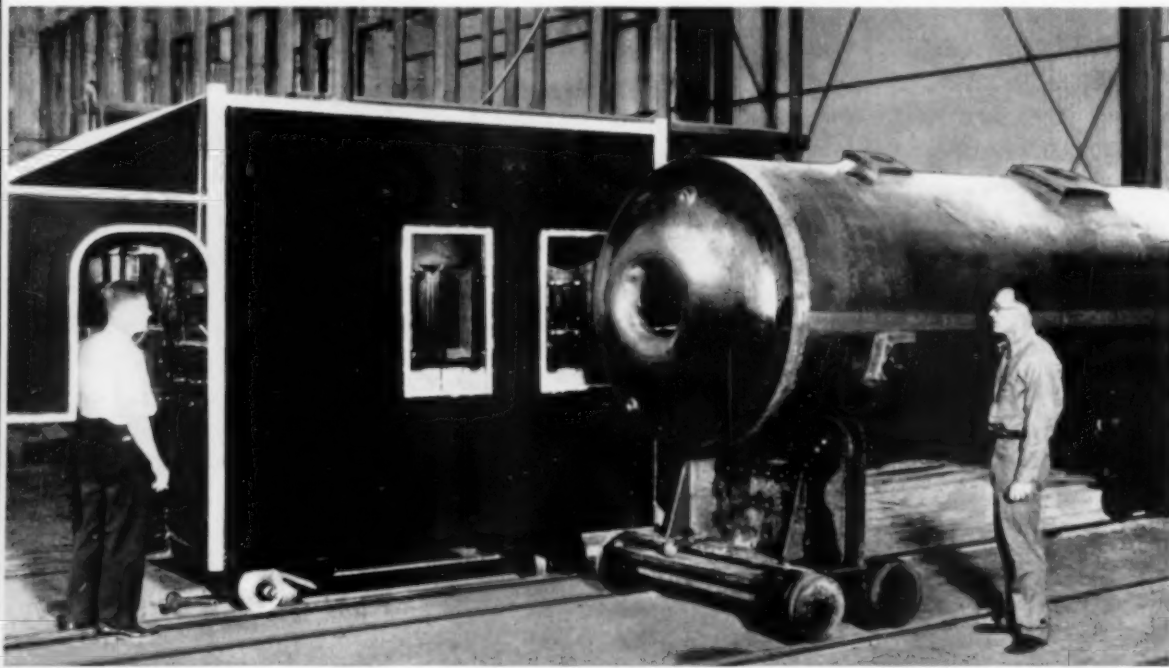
First X-Ray Equipment at Chattanooga Plant of Combustion Engineering Co., Inc. (Hedges-Walsh-Weidner Division) Was a 2-Tube 200,000-Volt, Air-Cooled Outfit in a Movable Shelter
